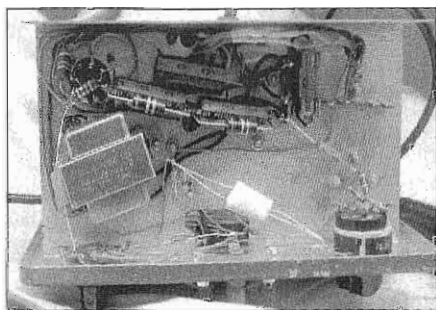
Here is a bottom view of the C-3 chassis showing how I mounted the 12.6 VAC filament transformer for the tubes.
